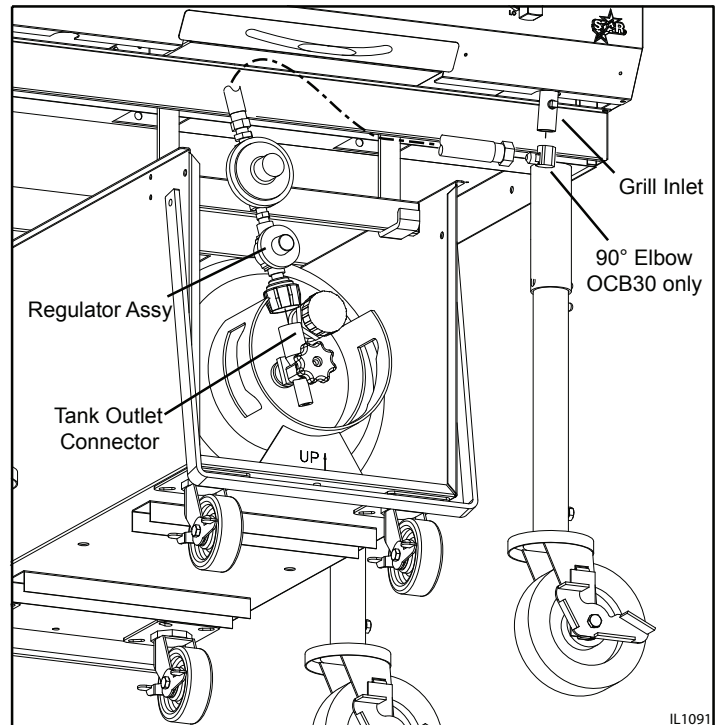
, Connecting the Regulator Assembly from the LP Tank to the Unit.
